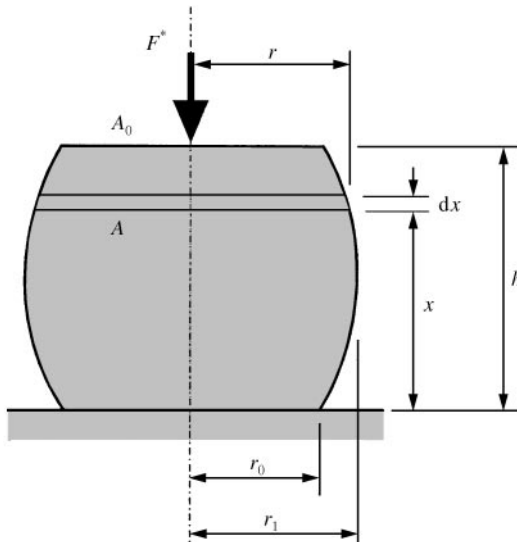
Deformed barrel shape of compressed cylindrical rubber element.
